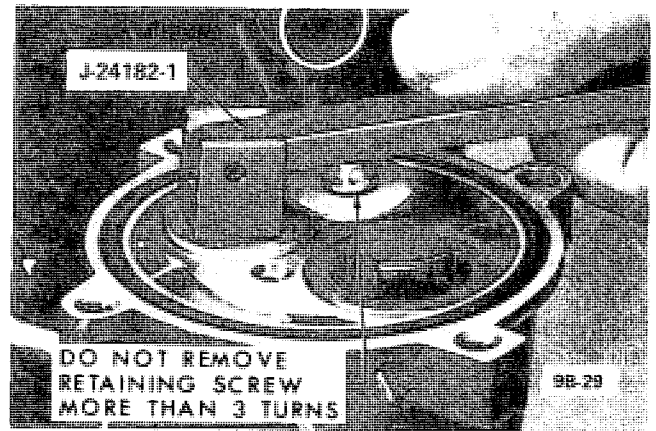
B-18 Capsule Removal Tool Attached to TX Valve Capsule
